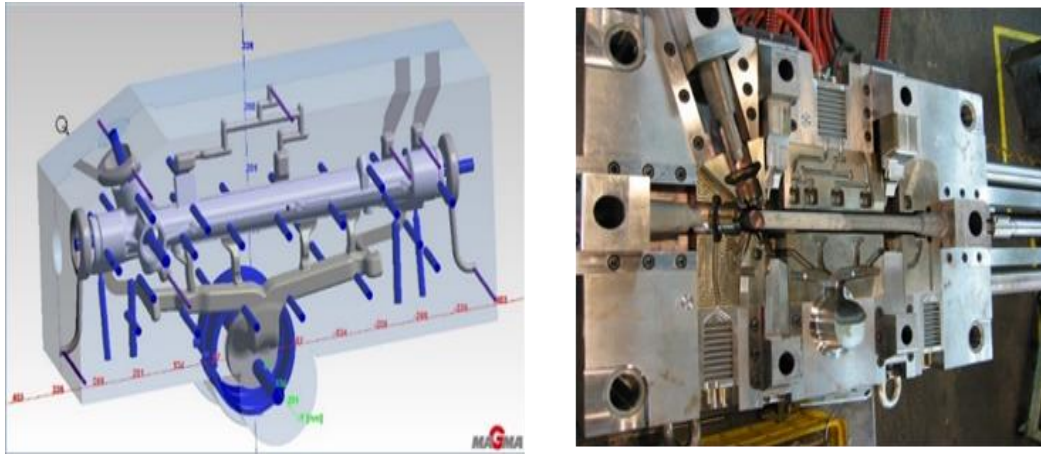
The power steering rack housing 3-D geometry model resembles the real moulding state
